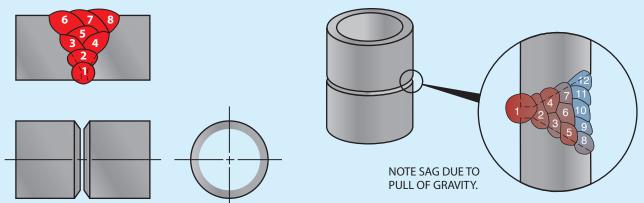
Weld bead sequence for 1G and 5G positions.
